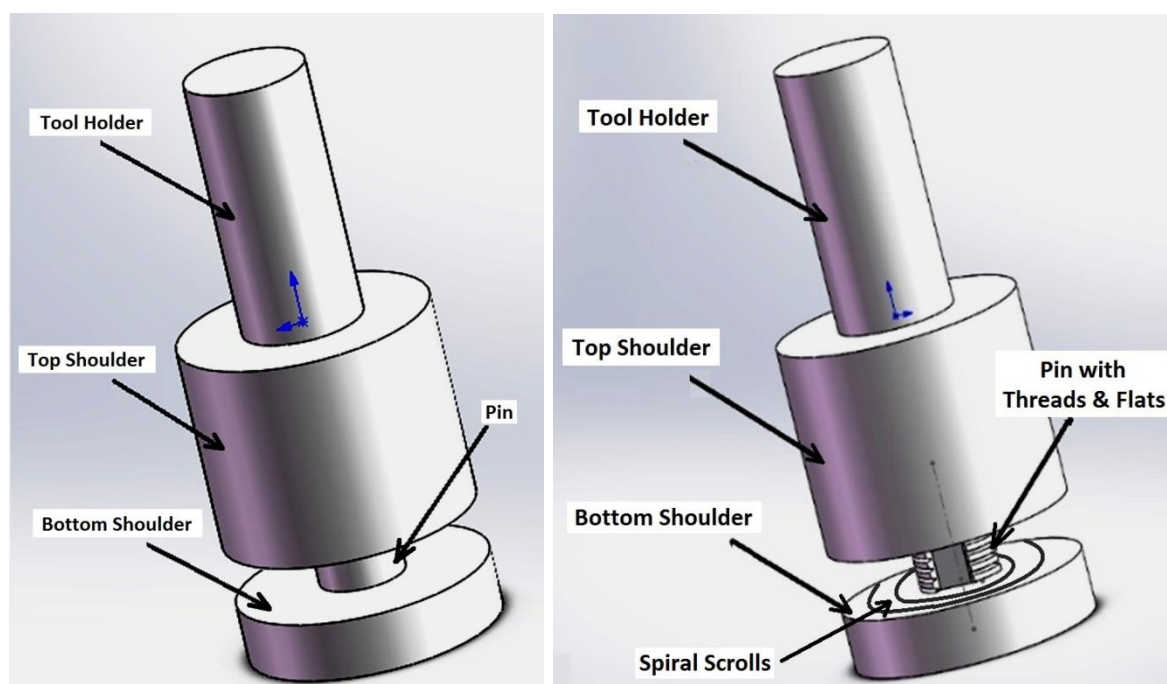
3D schematic of the bobbin-tools, utilised for the welding of the aluminium plates; (a) single-piece bobbin-tool without ant surface features, utilised for BFSW processing of the AA1100 aluminium plates, (b) fully featured (threaded tri-flat pin, with scrolled shouldered) fixed-gap bobbin-tool, used to weld the AA3003 aluminium plates.
